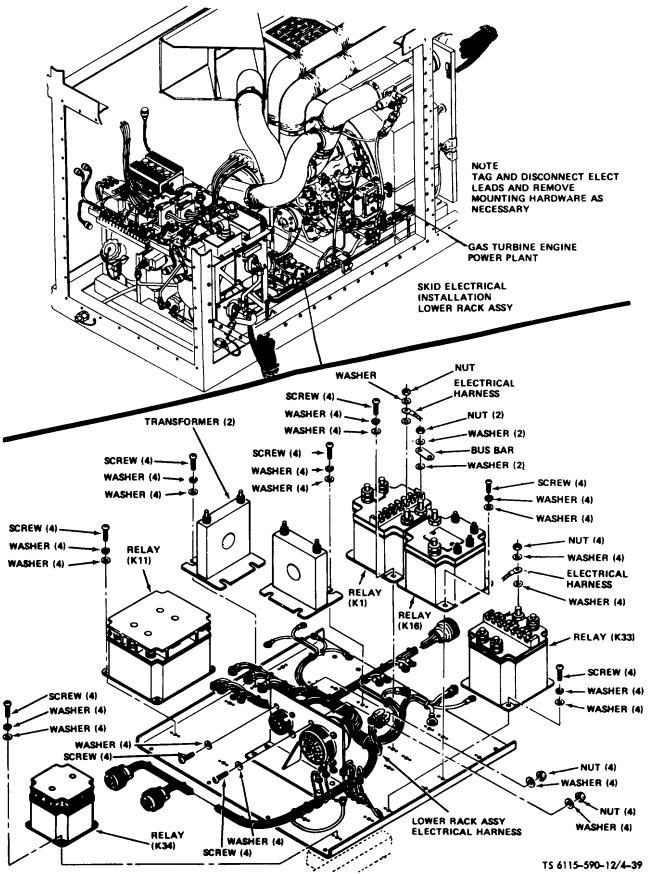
Lower Electrical Power Chassis Assembly Component Replacement (TS 6115-590-12/4-39). Change 6 4-89
